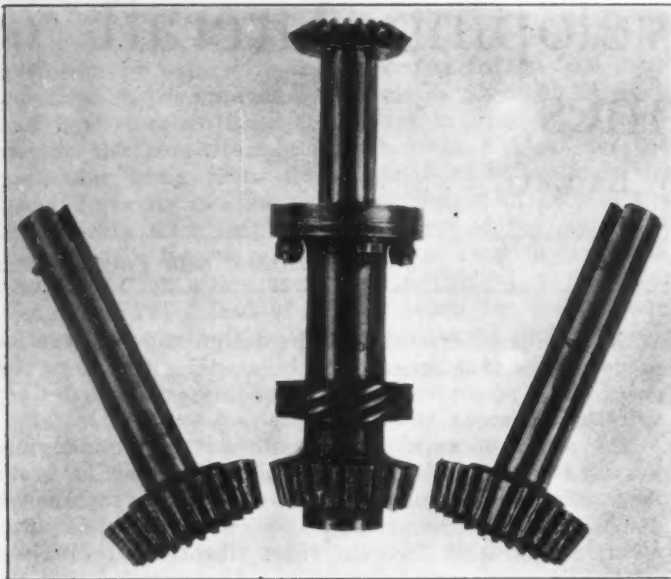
TYPICAL SET OF CRANKSHAFT GEARS THAT HAVE BEEN DAMAGED BY WHIPPING OF THE CRANKSHAFT
